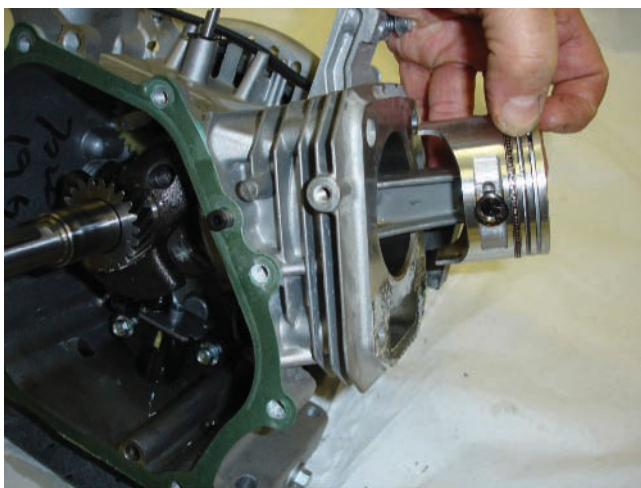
In a four-stroke power equipment engine, the piston generally is removed from the top of the cylinder.
